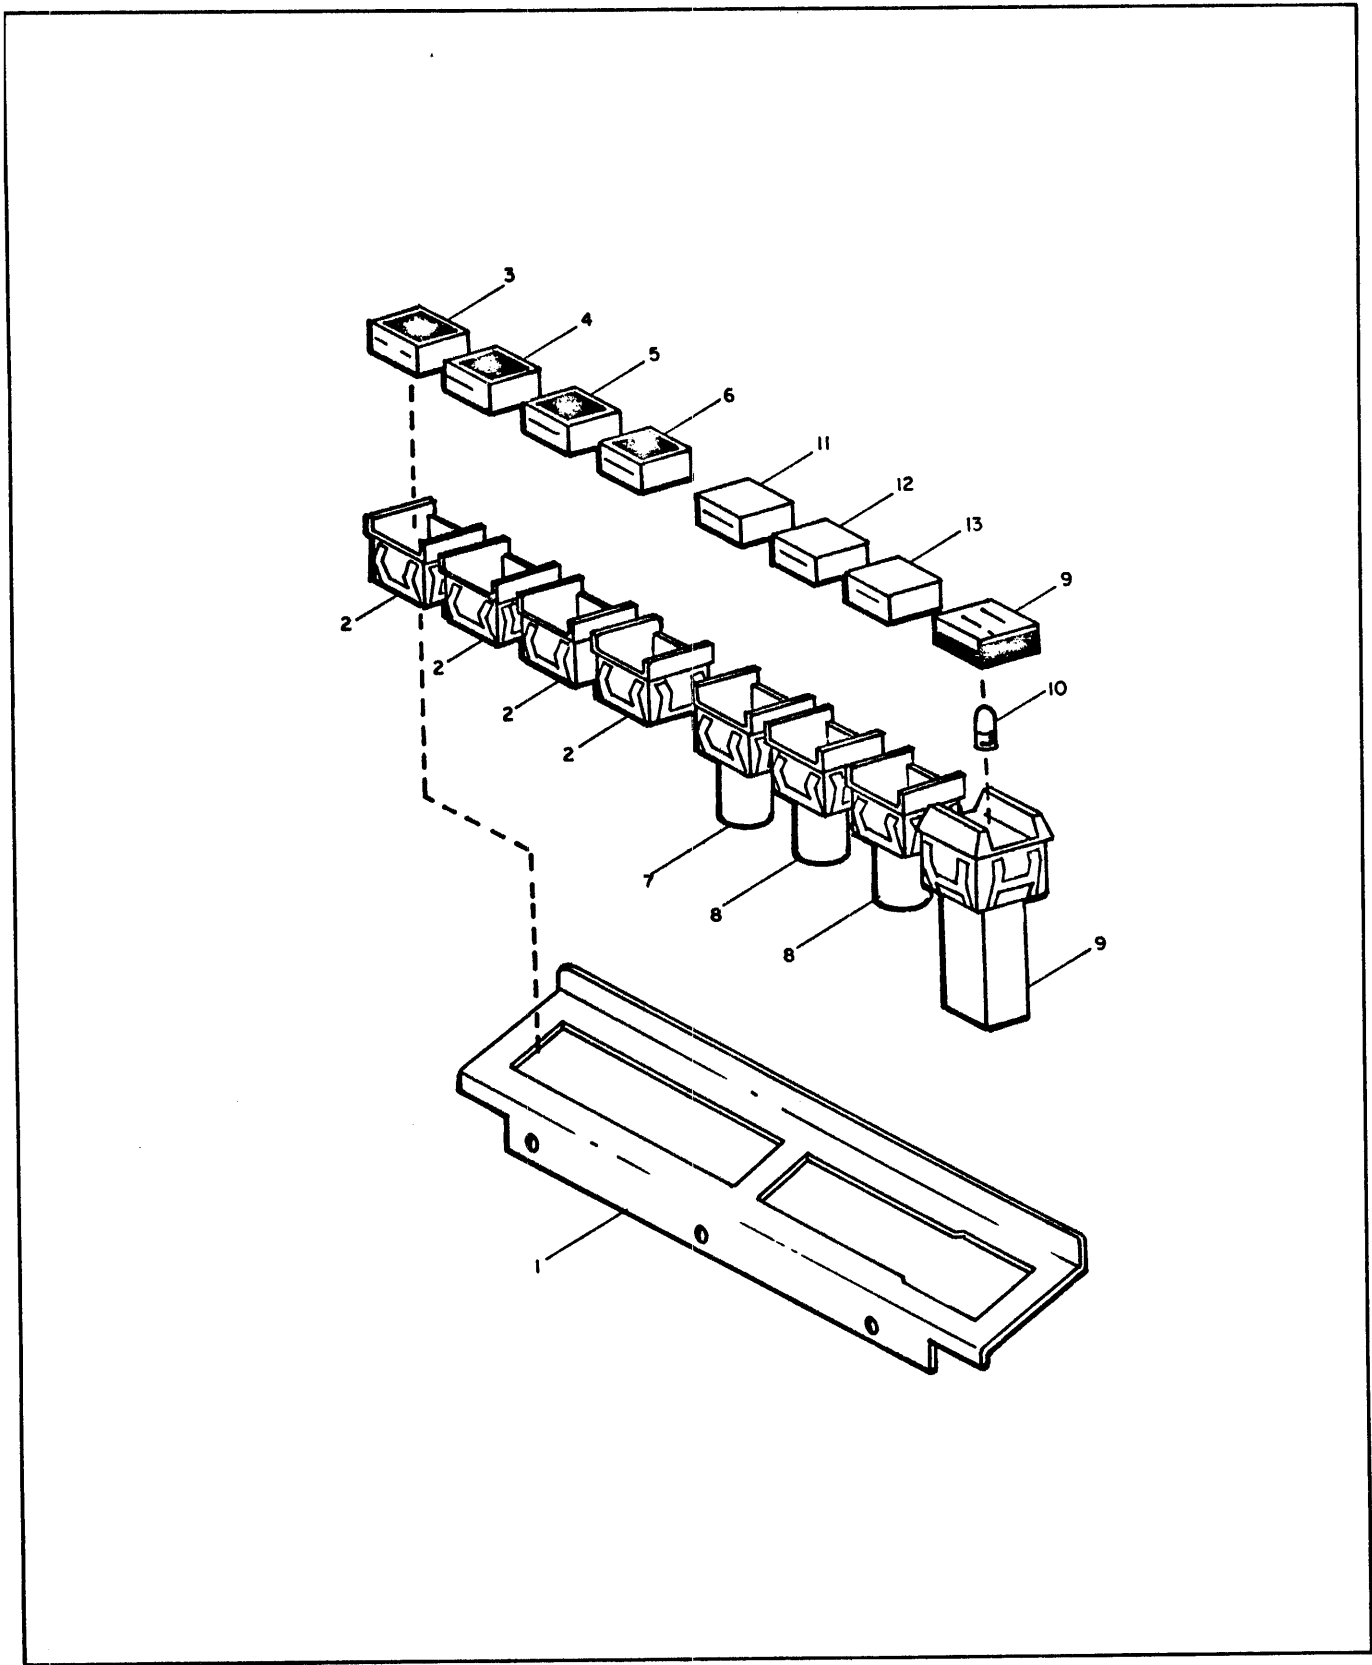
CONTROL PANEL ASSEMBLY
